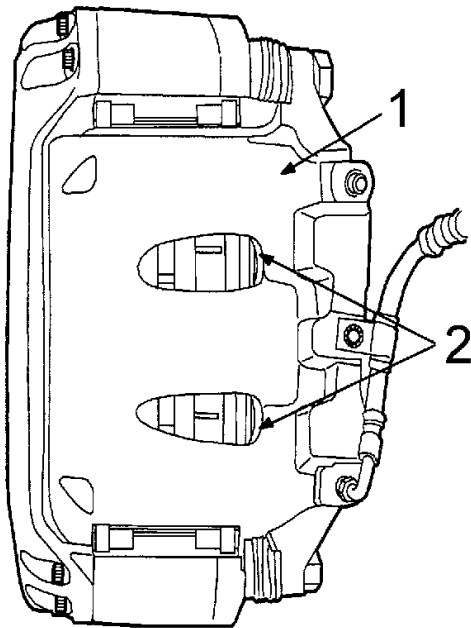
Hydraulic Pin Slide Disc Brake — Driver Side Rear (73 mm)
